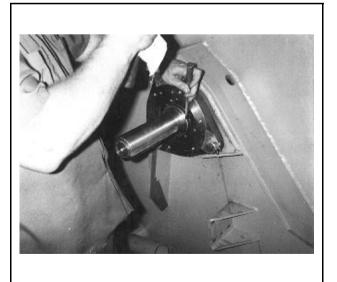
(MSSM0303AE) Tightening the Bearing Locknut (42" machine shown)
